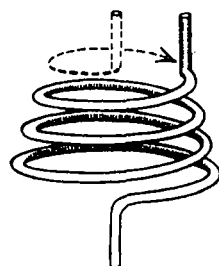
Spiral of Fig. 2 enlarged coneshaped
